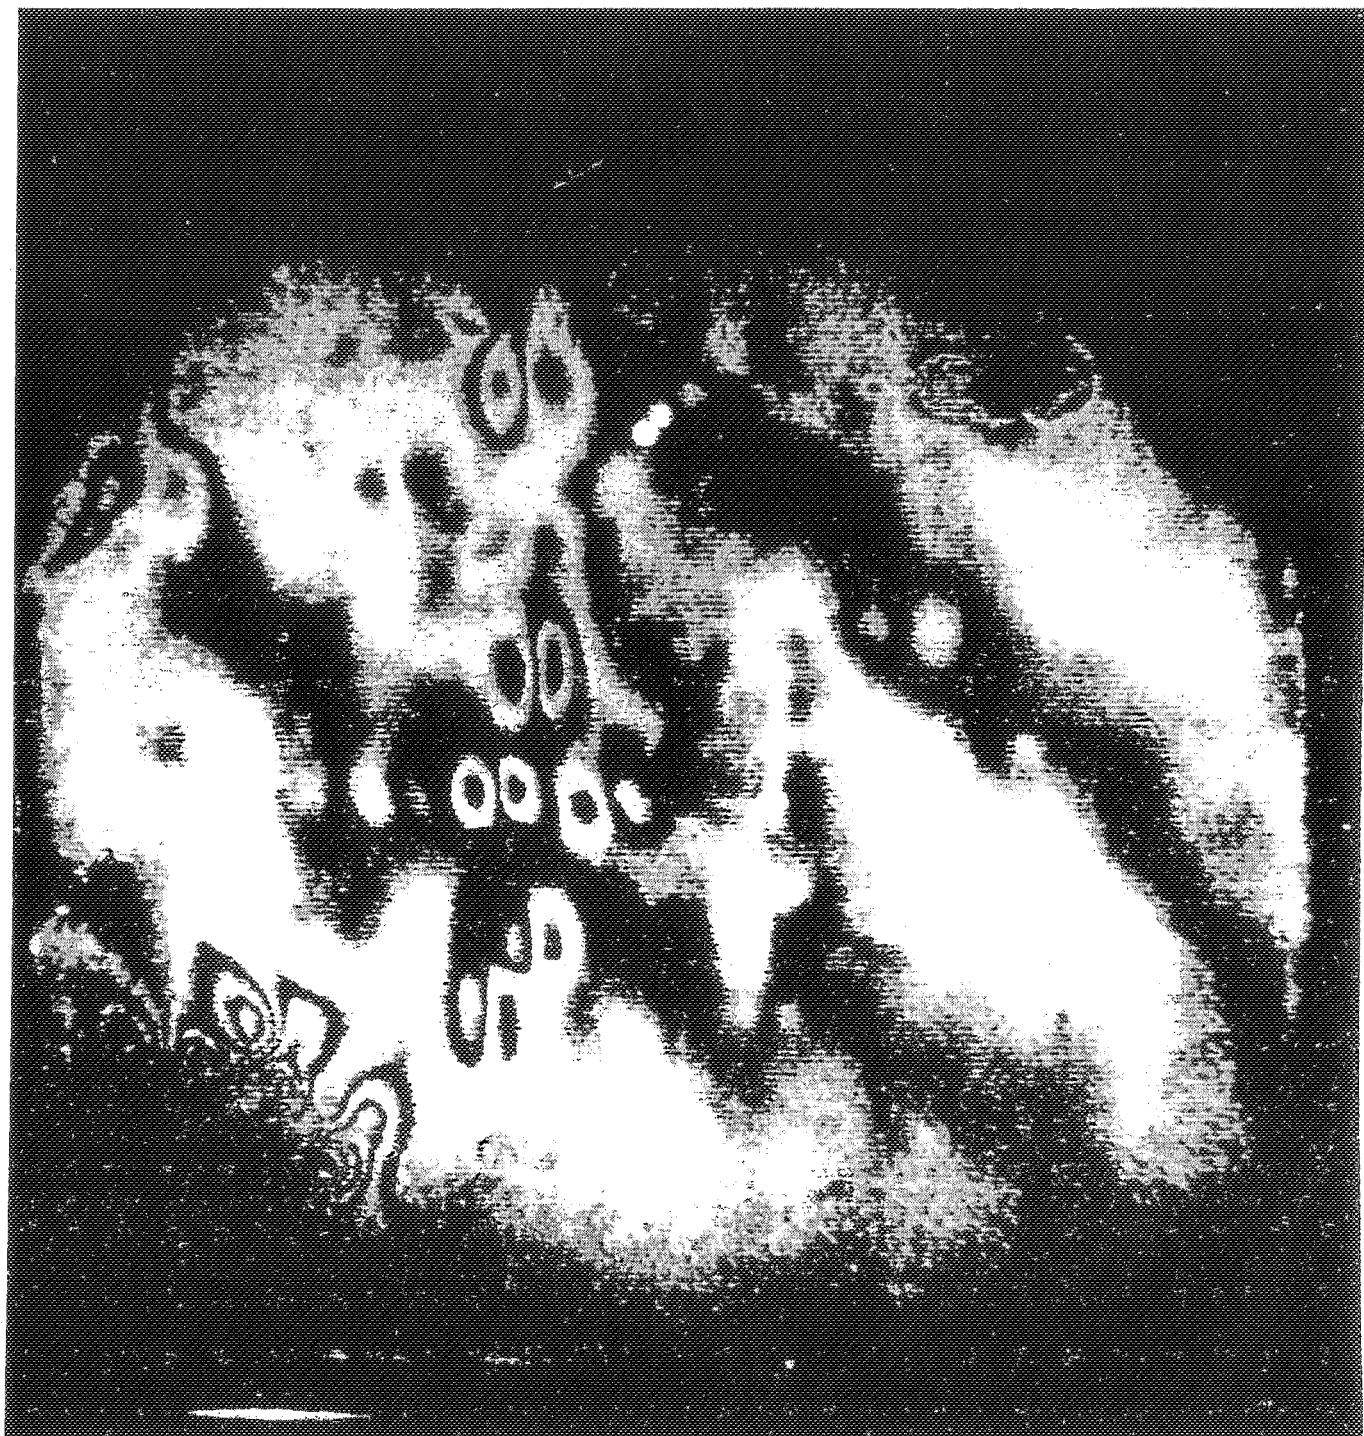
Fringe pattern reveals several areas of separation in a large cord-reinforced rubber panel using partial vacuum stressing.
